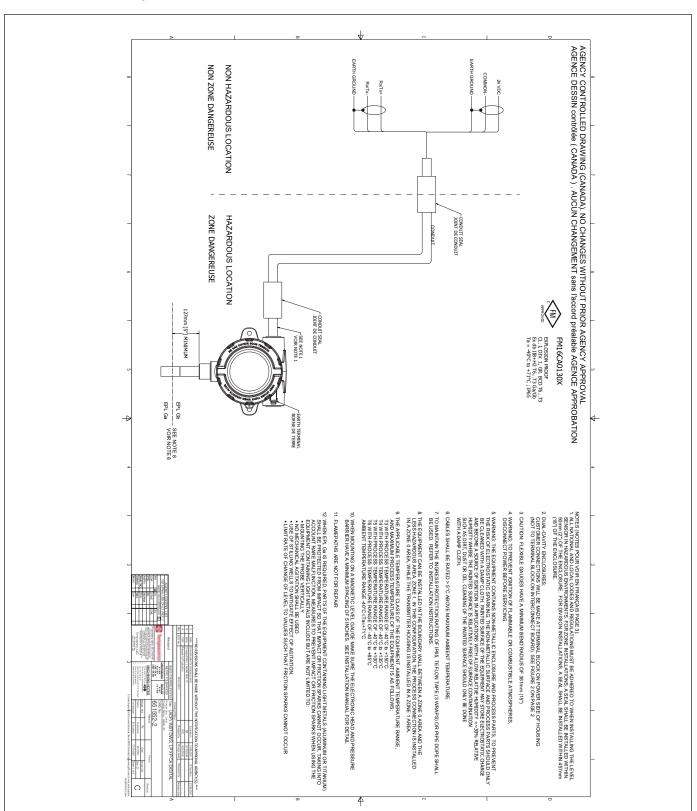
Explosionproof, FMC Installation Drawing, Modbus and DDA, Page 1
